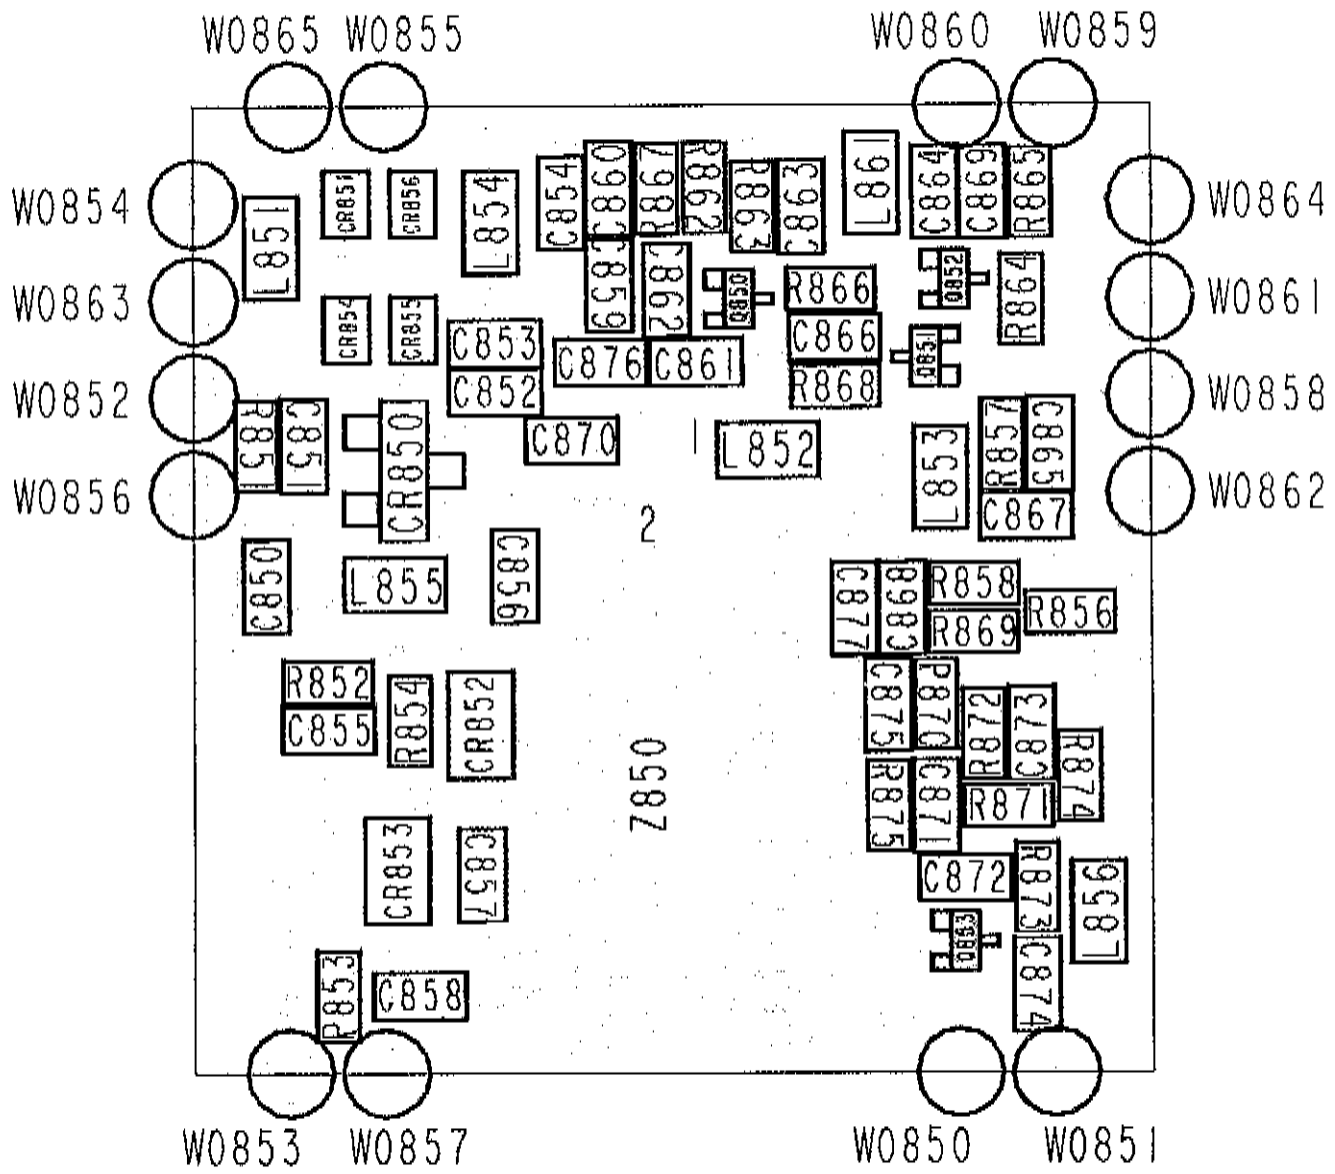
VCO COMPONENT LAYOUT (COMPONENT SIDE VIEW)
